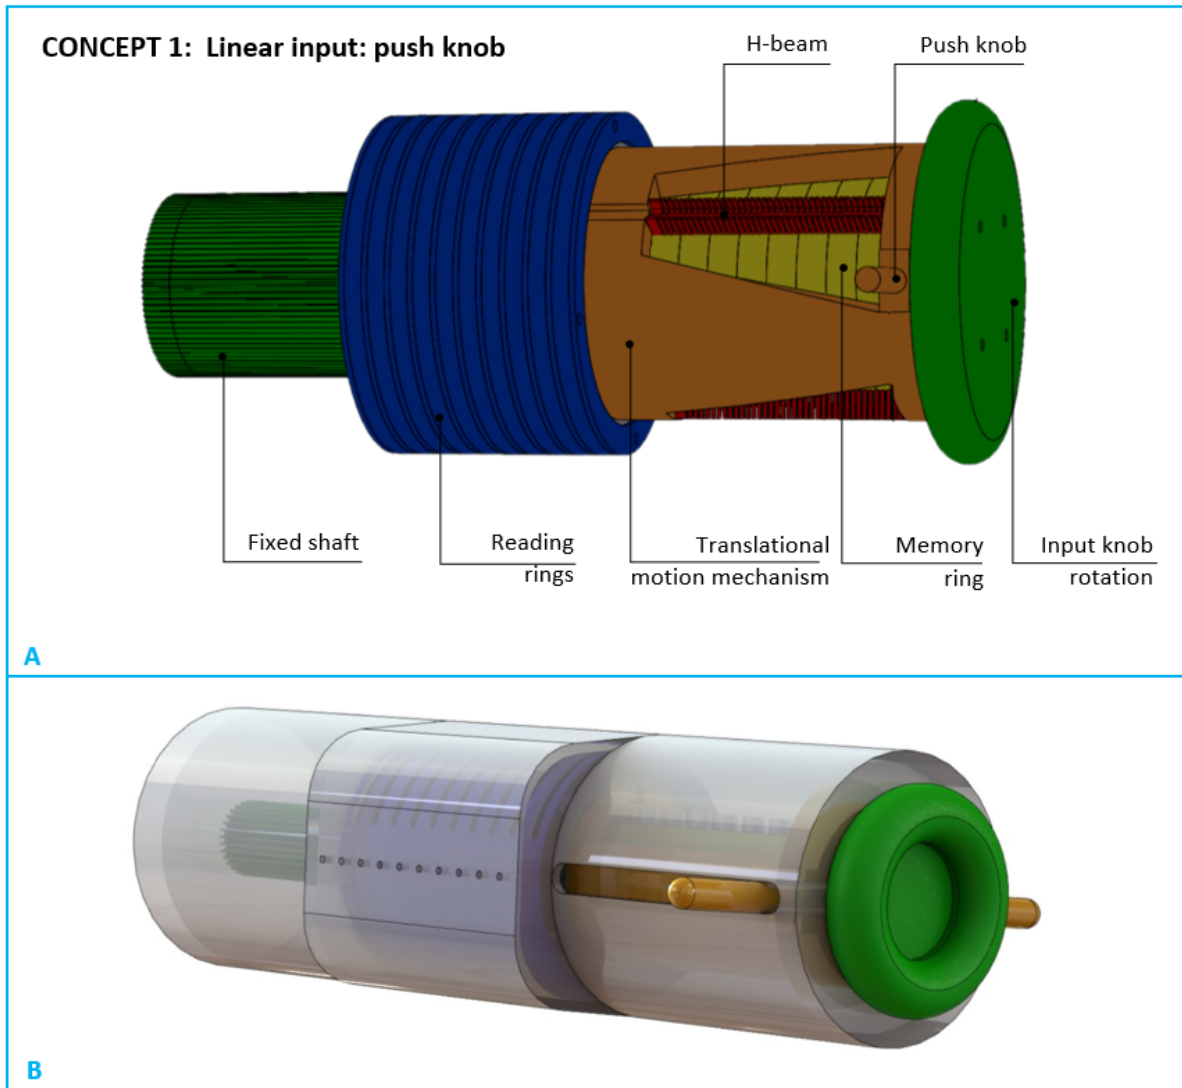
Concept 1: push knobs for a linear input. Figure A shows the main components of the design. The main components include the input shaft, input knob, fixed shaft, memory rings, reading rings, H-beams and the translational motion mechanism. In this design the user directly pushes the translational motion mechanism (orange), holding the pins on each side. The translational motion is in this case provided by a linear input. Figure B is a CAD drawing of how the design would look with a perspex casing around it.
